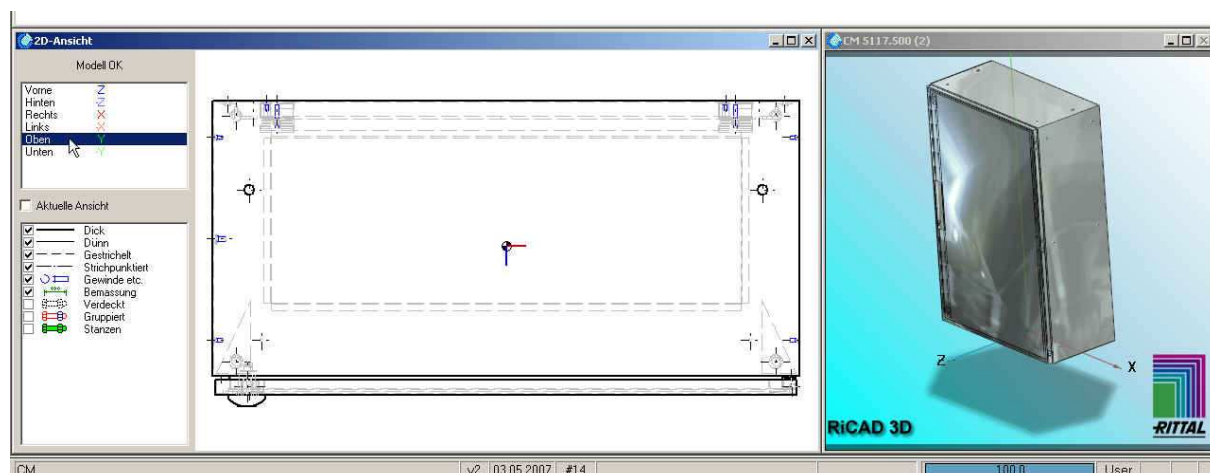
Detailed 2D view (left) and 3D preview (right) in RiCAD 3D
